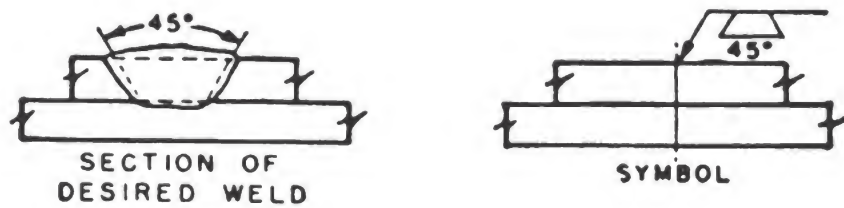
Included angle of countersink of plug welds.
